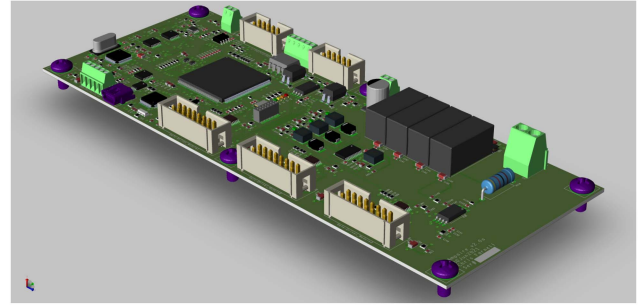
Isometric 3-D model of custom controller PCB [16].
